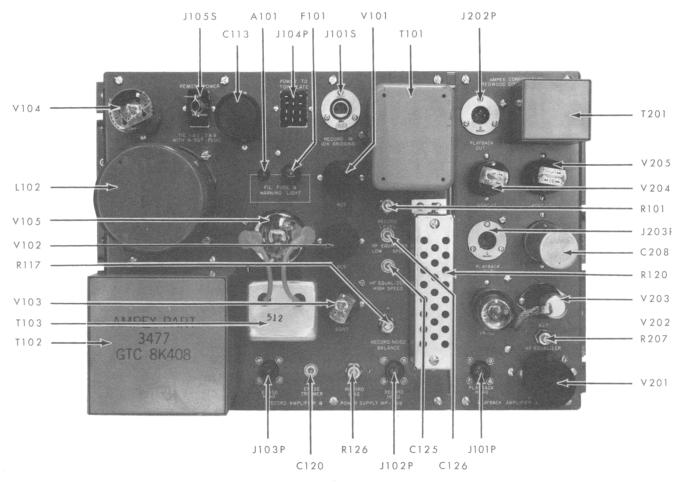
ELECTRONIC ASSEMBLY COMPONENT CALLOUTS
